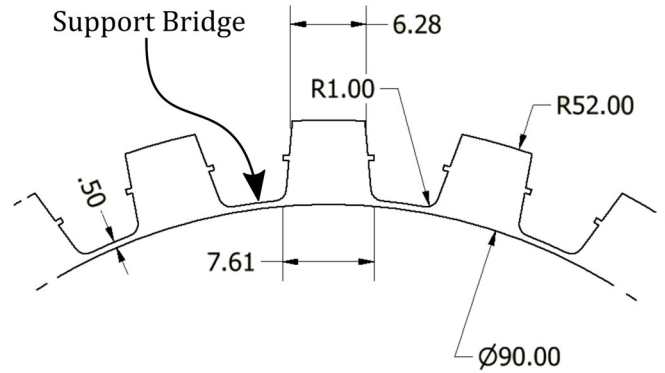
A cross-section of the modified ferromagnetic pole-pieces rotor with a support bridge [28].
